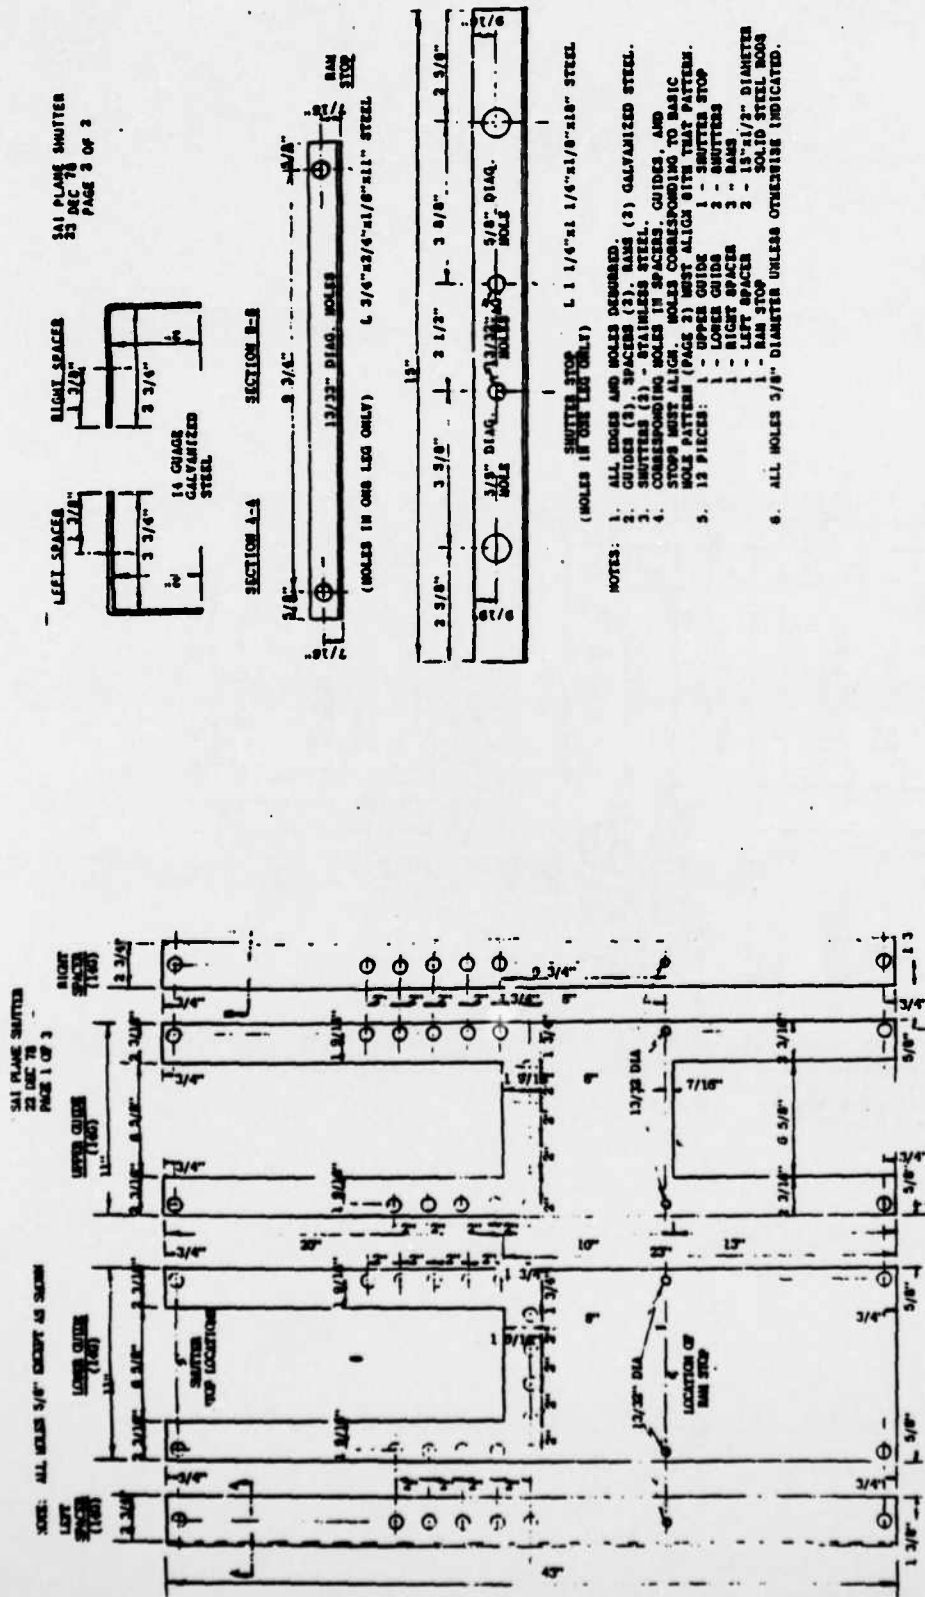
Plane Shutter Fabrication Drawings.
